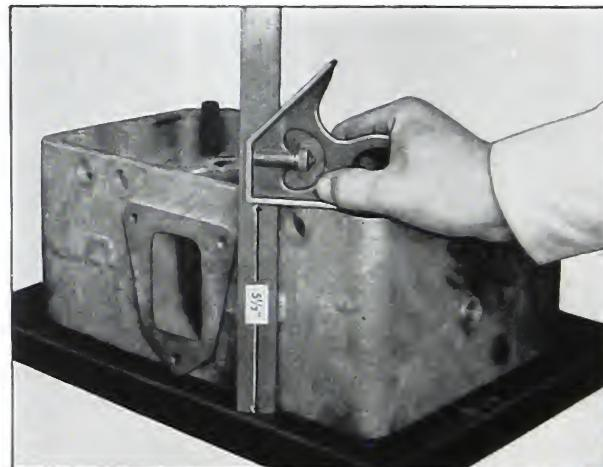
Checking height of cylinder head suitable for rebuilding.
